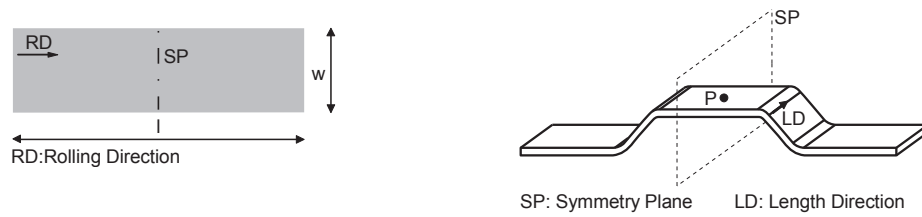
Friction experiment; Left: Specimen of the experiment; Right: Shape of the specimen after the forming operation.
